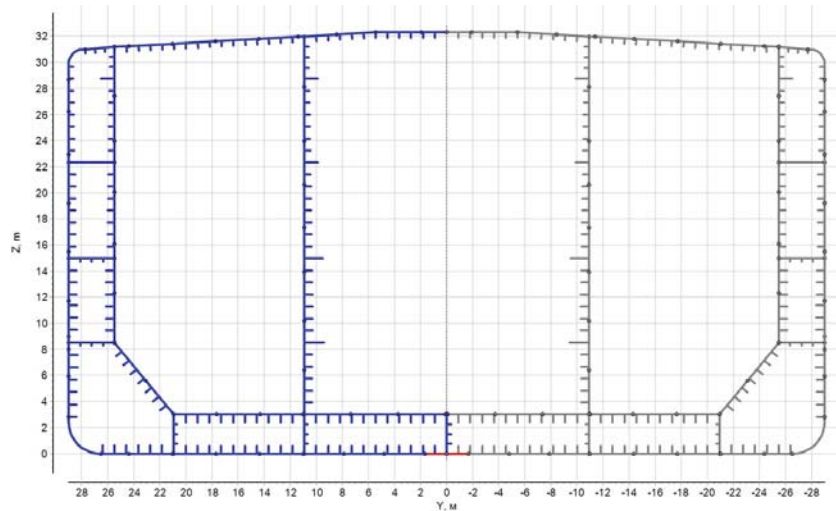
Structural modeling of the ship hull cross-section (first mode).
